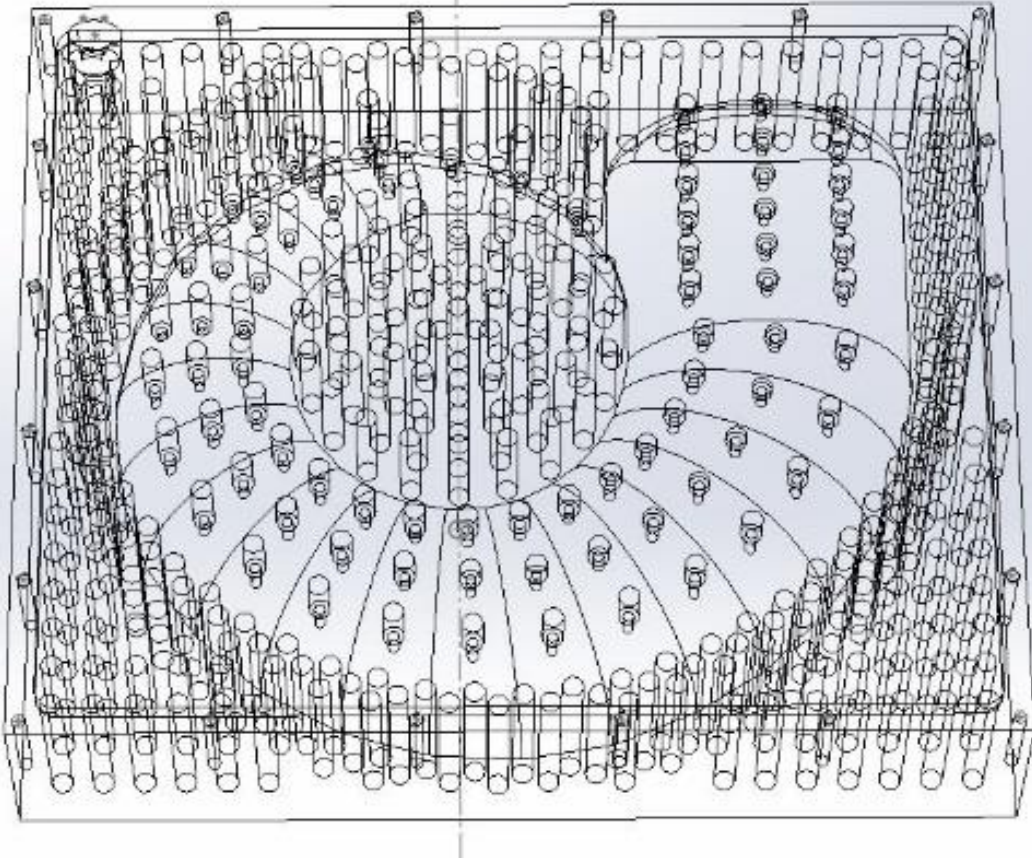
Wireframe view of the vacuum mold design showing the offset drill holes.
